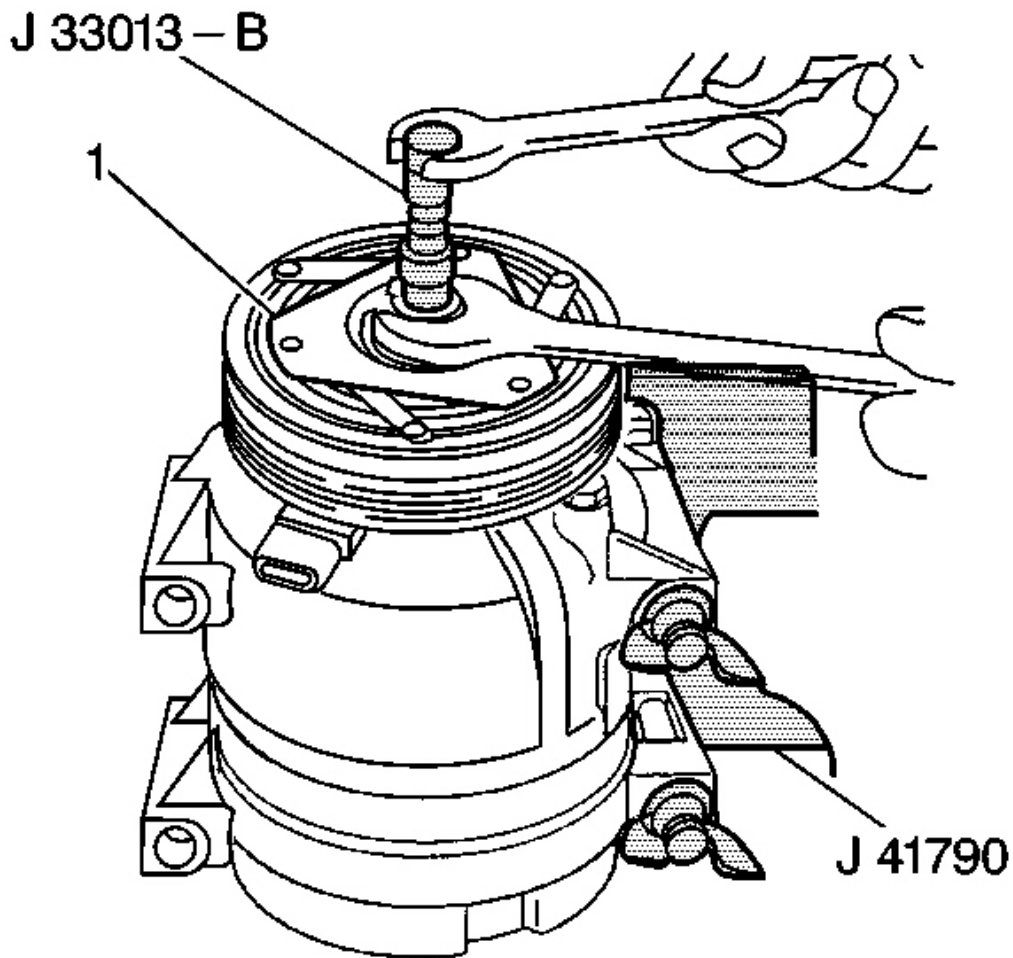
Clutch Hub, Drive Plate Assembly J 33013-B & J 41790
